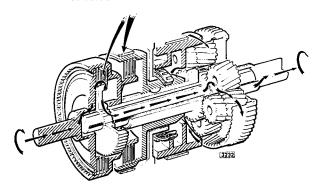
Mechanical powerflow — Second gear (Lock-up or Drive 2) selected
